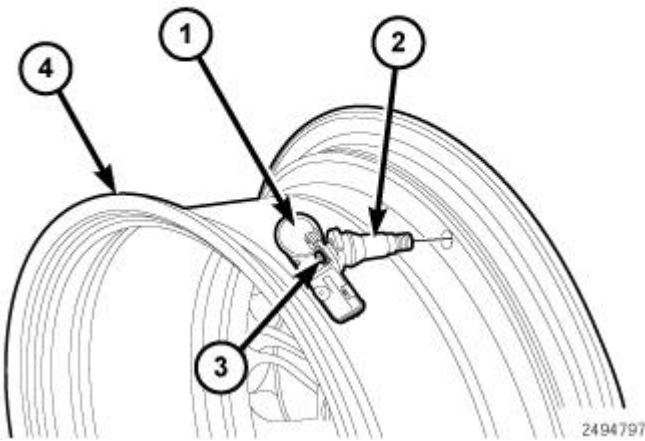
Valve Stem Retainer Screw, Sensor & Valve Stem
